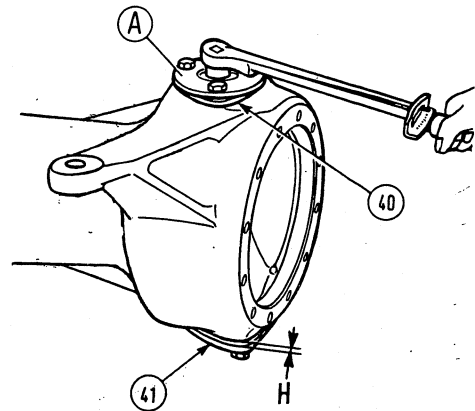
Finding the spherical bearings shim stack (S_2 , Fig.5) by means of tool A 292220 (292220)
